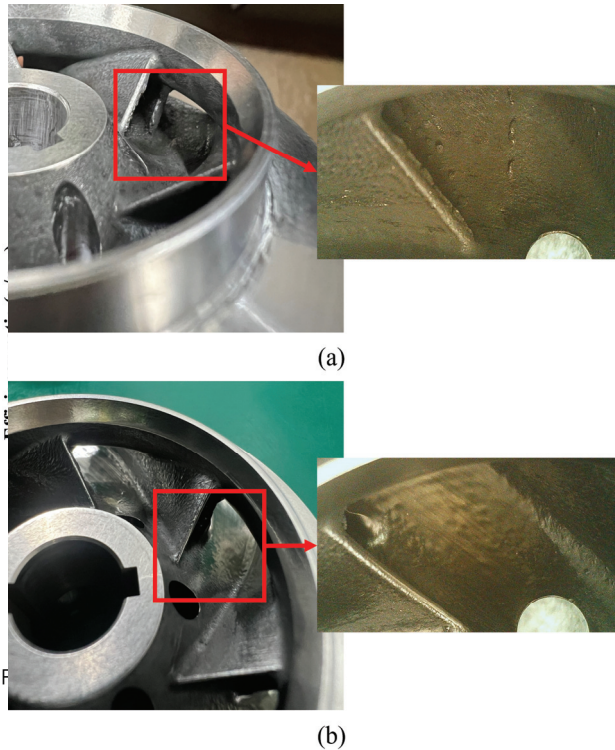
Surface of impeller (a) before AFM, (b) after AFM
